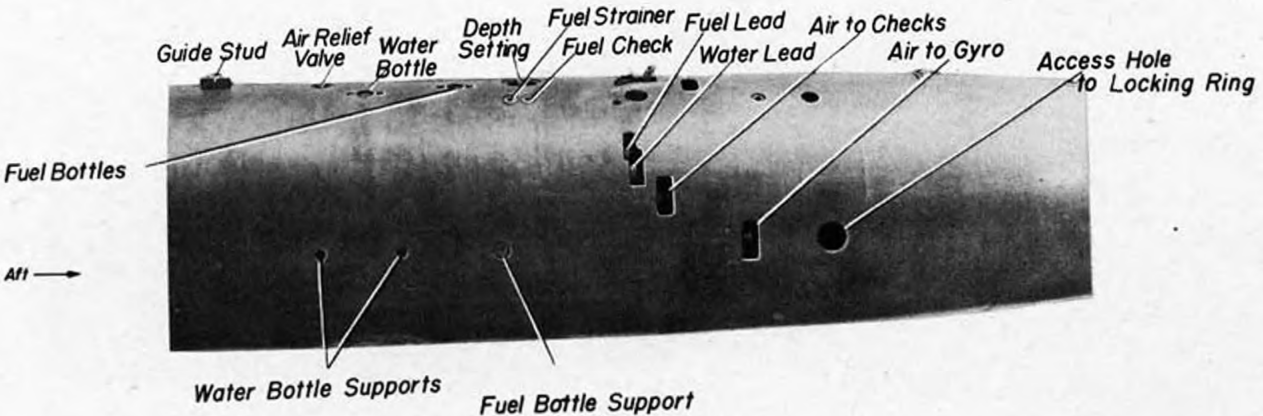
Torpedo Type 2 (Special), Flask Section, Port View
